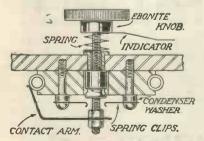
Showing the alterations necessary to the filament resistance. clips may be made out of brass strips. The spindle is altered as shown in the diagram. A spiral spring is placed under the ebonite knob; the tension of this spring should be slightly less than the combined tension of the two spring clips. A terminal head may be used for the spindle
